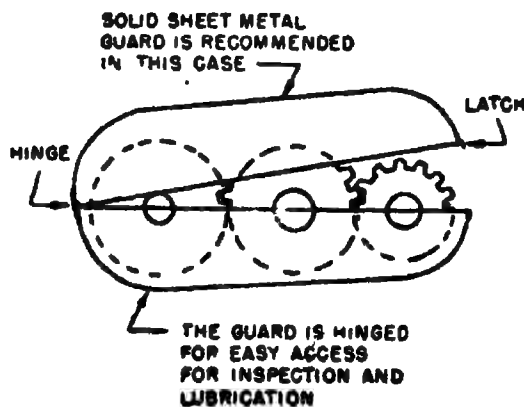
TYPICAL GUARD FOR GEAR MECHANISMS.
